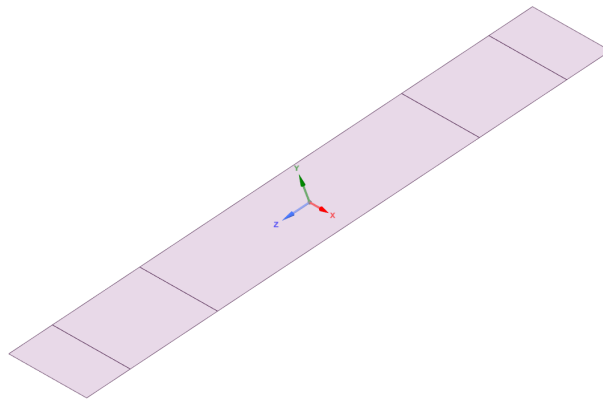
Geometry of single-layer LOM printed jute/PLA biocomposites flexural specimen.
